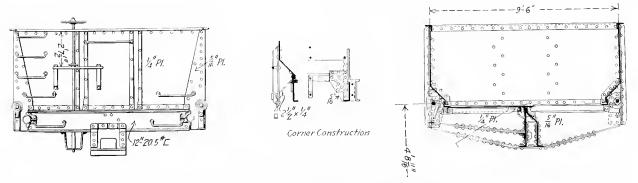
End Elevation and Cross Sections of All-Steel 50-Ton Capacity Drop Bottom Side Dump Gondola Car Shown in Fig. 329.
